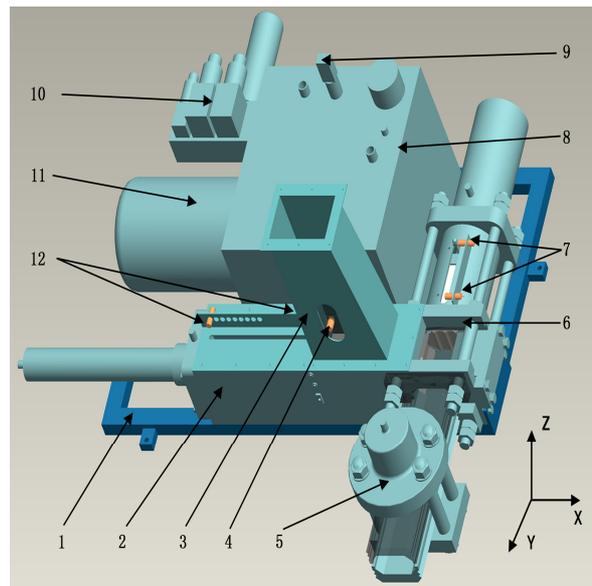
Three dimensional structure drawing: forming machine with the type of hydraulic driving
